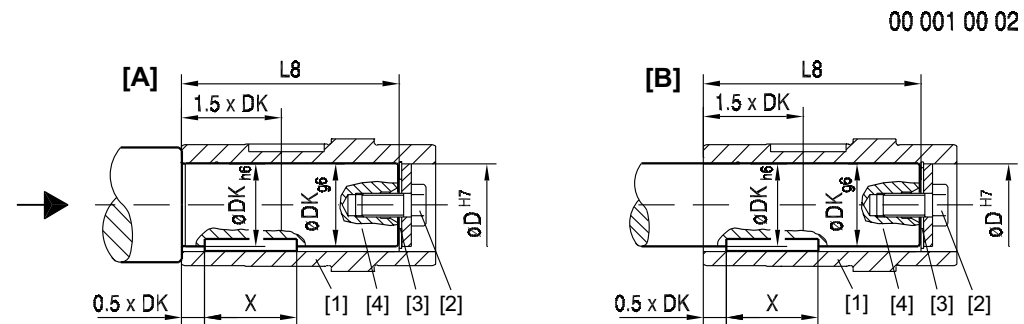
Customer shaft with contact shoulder (A) and without contact shoulder (B)
